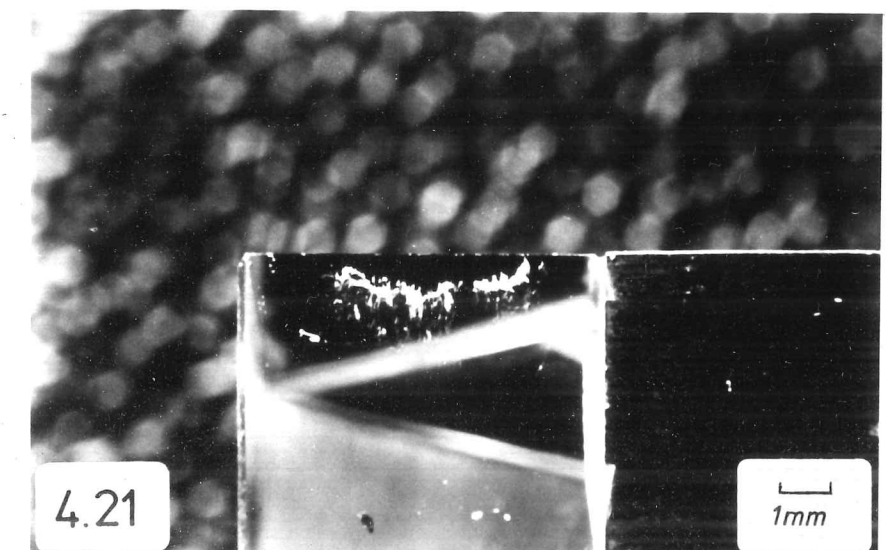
Rake face of transparent tool, after stopping and slowly disengaging the tool when machining indium in air.
